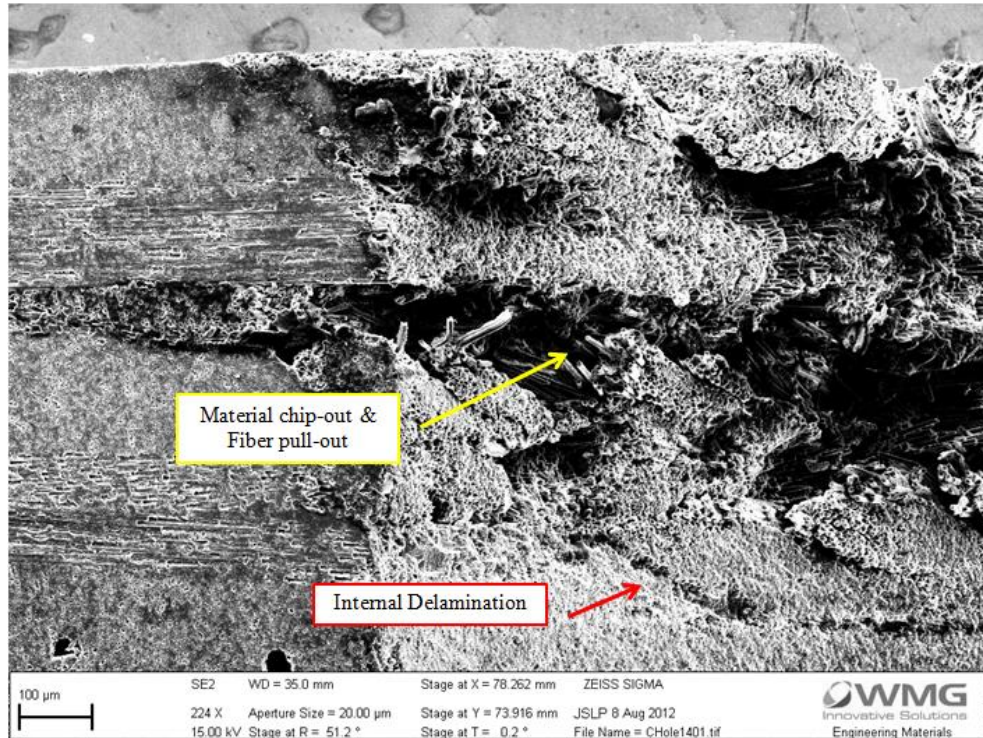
SEM image showing material chip-out, fibre pull-out and internal delamination on the machined surface produced from drilling of CFRP plaque with a pre-cooled tool
